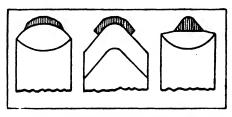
Three Typical Shapes of Diamond Turning Tools
